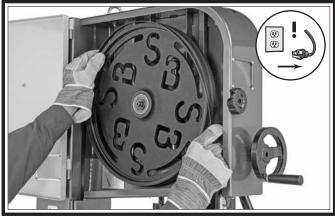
Removing blade and upper wheel to access blade tension lever components.
